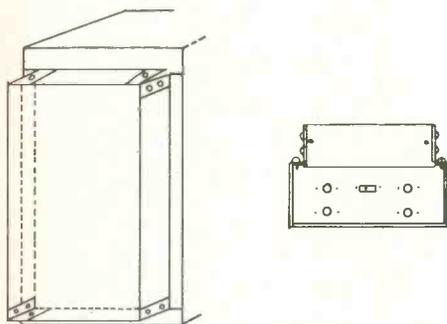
Layout of the shield. Although an optional feature, it should be used as a TVI eliminator.
